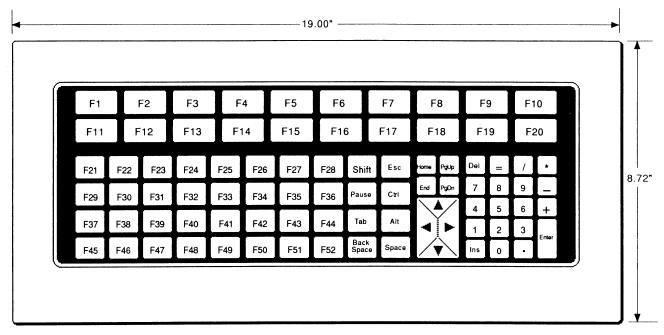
8000-KB3 Keyboard with Dimensions
